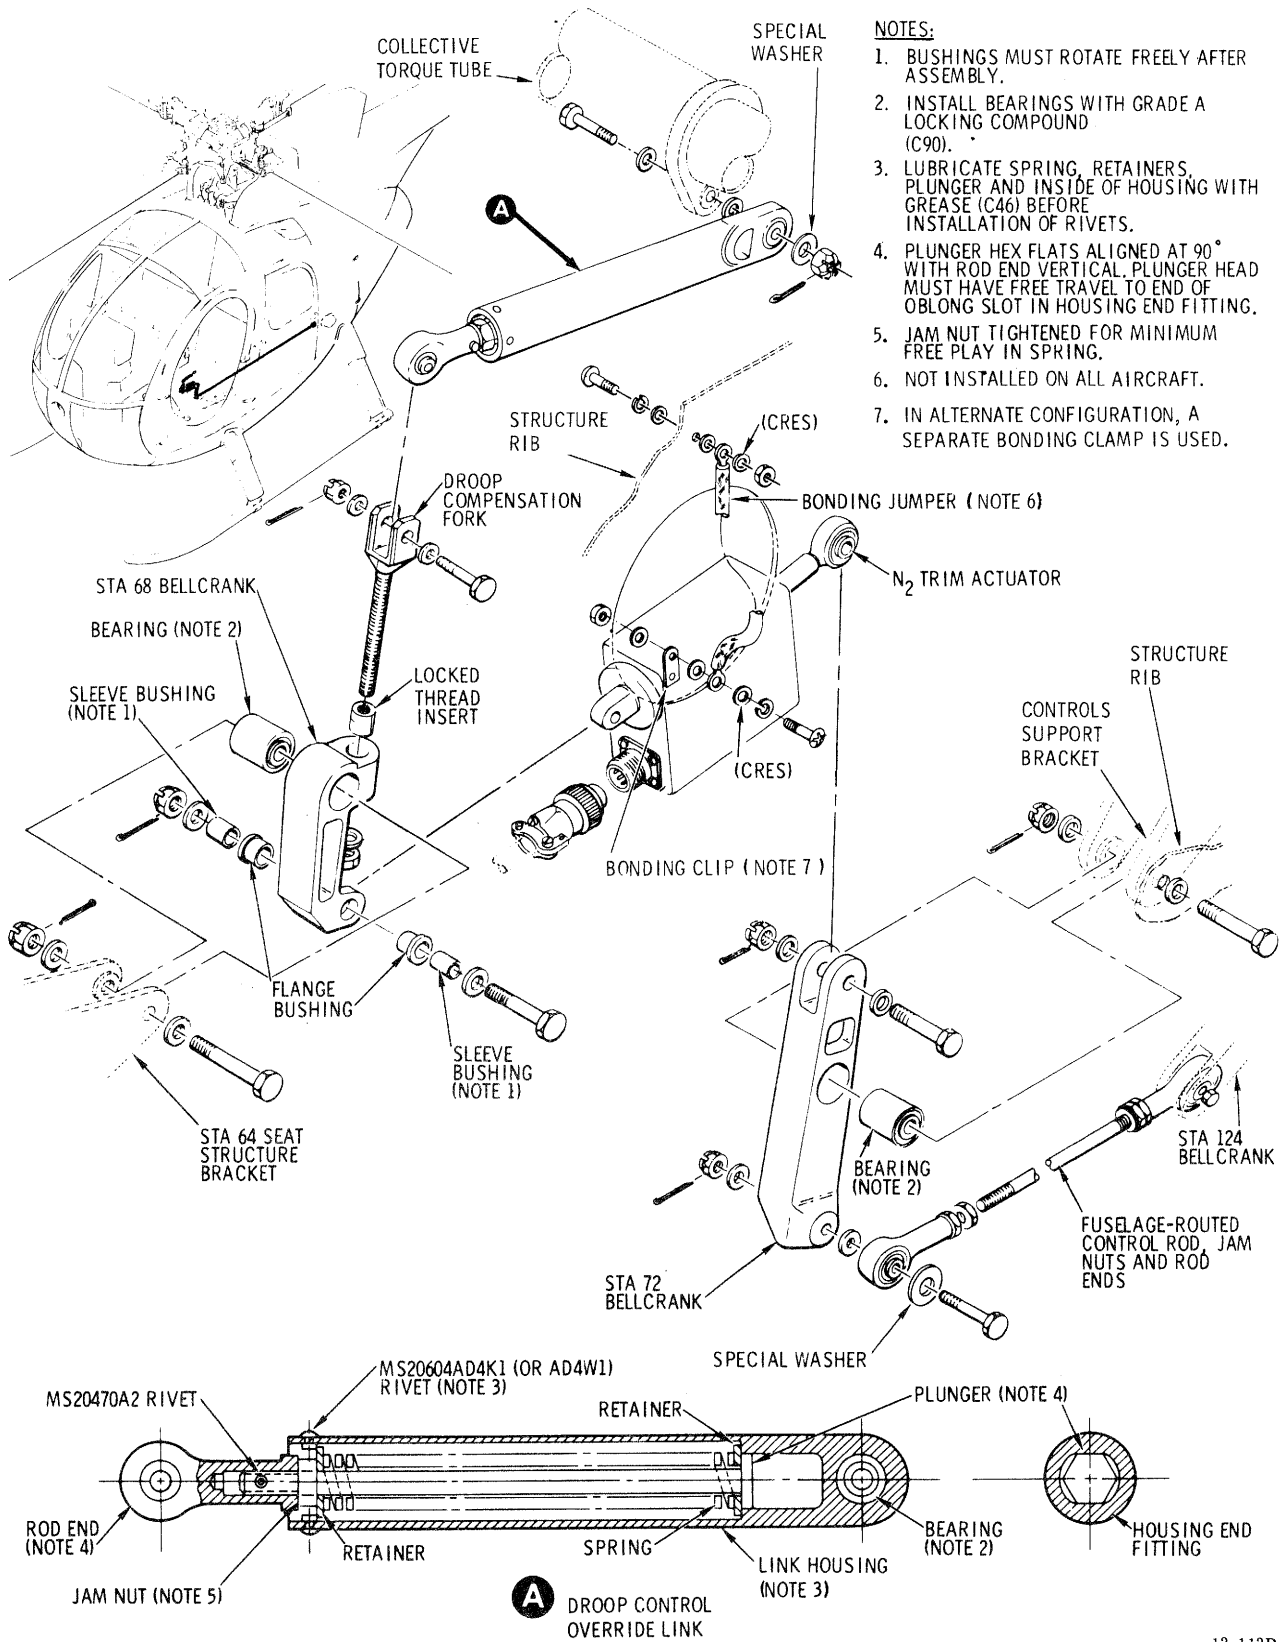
Governor Control Linkage (Forward of Engine Compartment) Disassembly.
